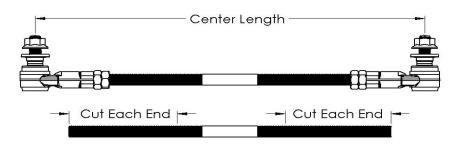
Threaded rod lengths "cut each end" and "center length" measurements
